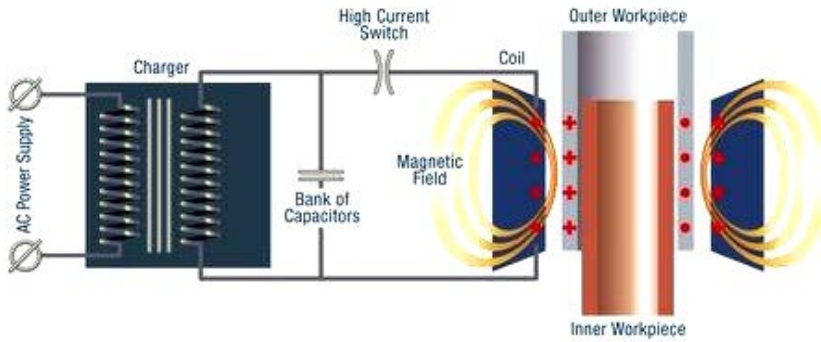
Magnetic Pulse Welding Circuit [69].
